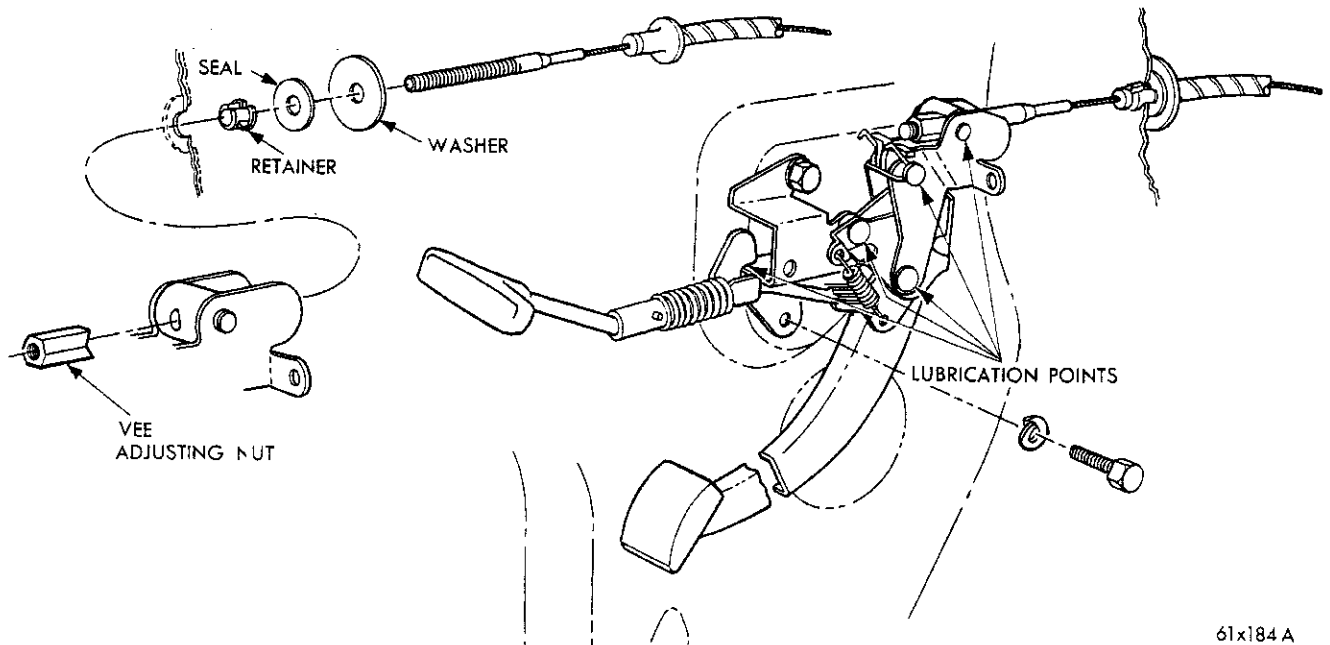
Parking Brake Pedal Lever and Cable Assy. (Chrysler)
